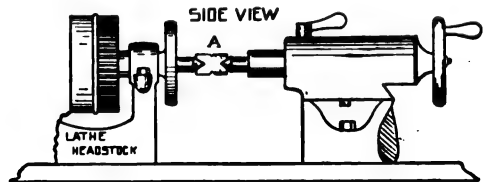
SHOWING GAUGE ON LATHE CENTERS AT A.
